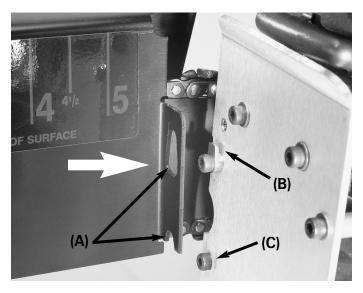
Slide mounting slots (A) onto locking key (B) and bolt (C)
